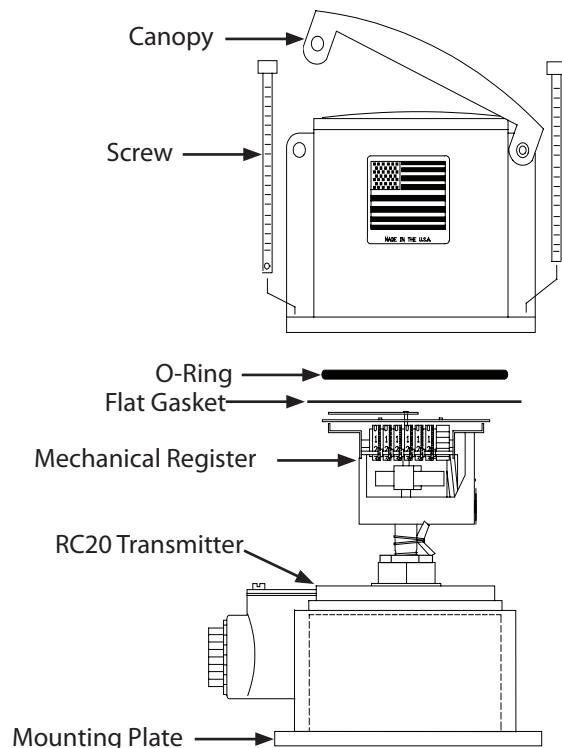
Attaching The Bonnet To The Installed RC20 And Mechanical Register
